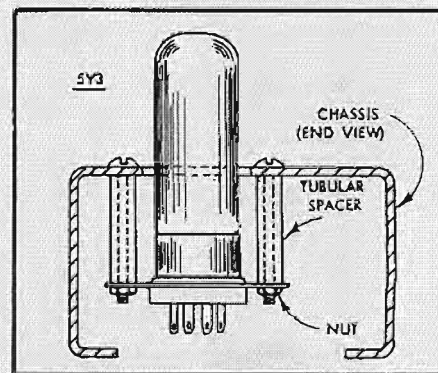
Method of recessing rectifier tube socket to conserve height.
